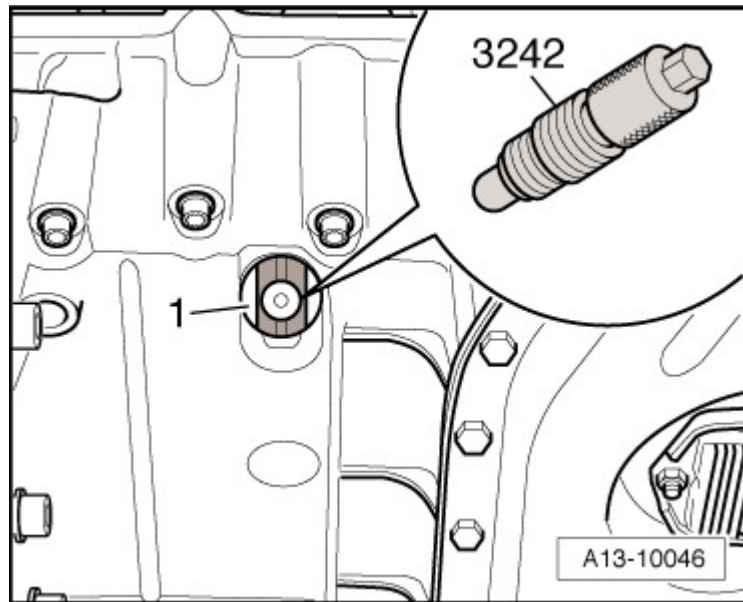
Identifying Crankshaft Holder 3242 In Bore
